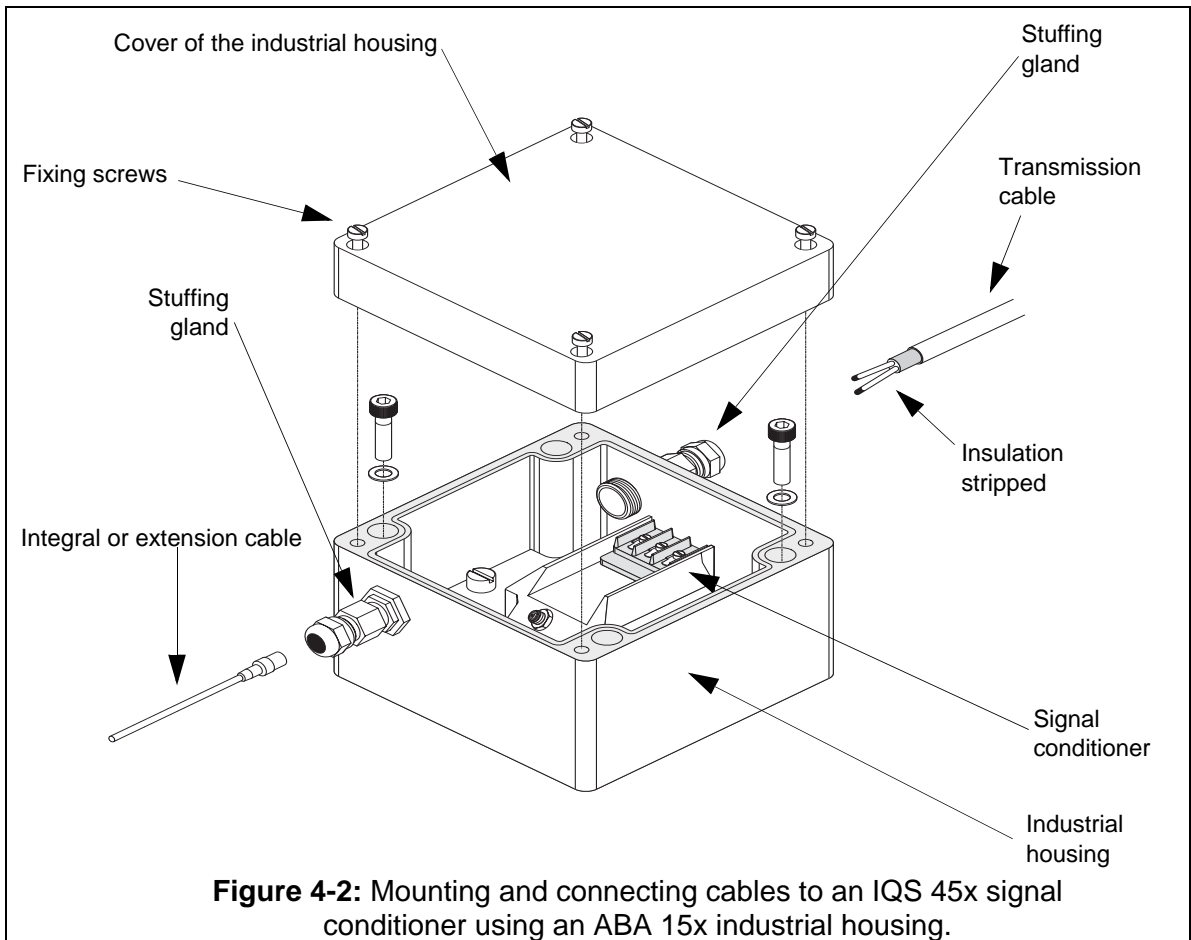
Mounting and connecting cables to an IQS 45x signal conditioner using an ABA 15x industrial housing.
